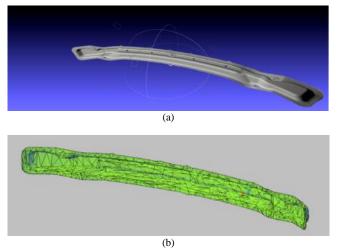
(a) Meshlab surface view (b) Autocad element view
